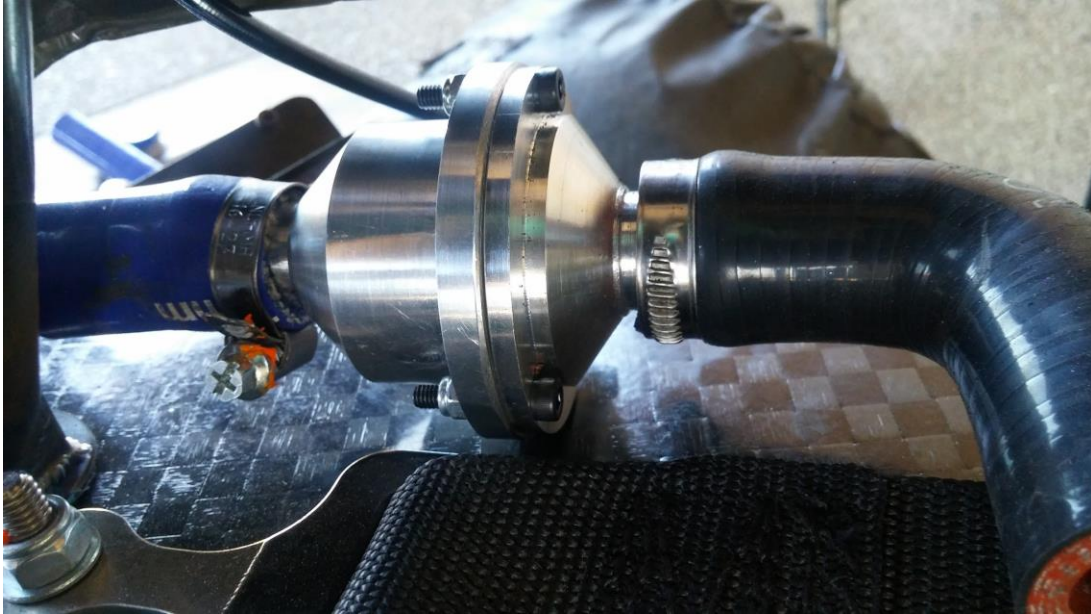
Assembly bolted together and attached to hose, ready to install in the car.
